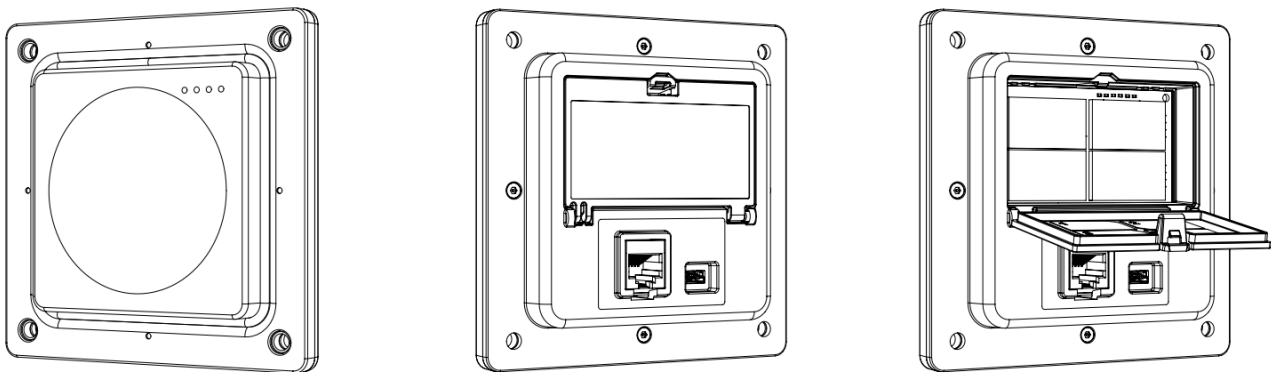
ID CPR46.10 Front view and rear view with closed and open hatch to SAM sockets
